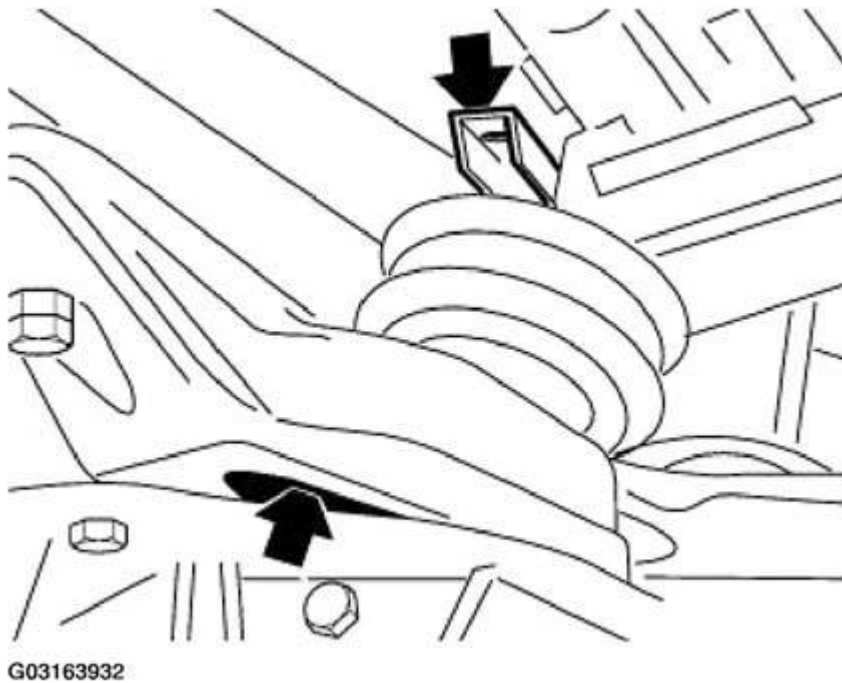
Loosening Top And Unfasten Bottom Of Left And Right Engine Mounts
